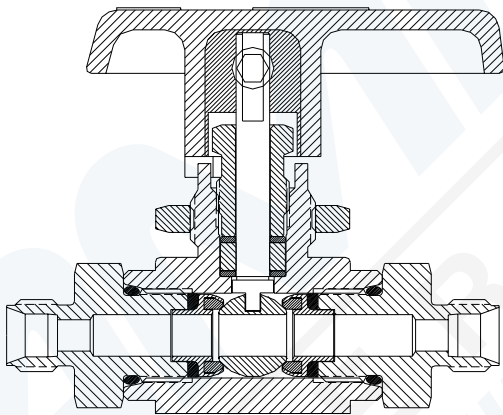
Two-Way B Series Ball Valve with PTFE Packing Cross Sectional View
